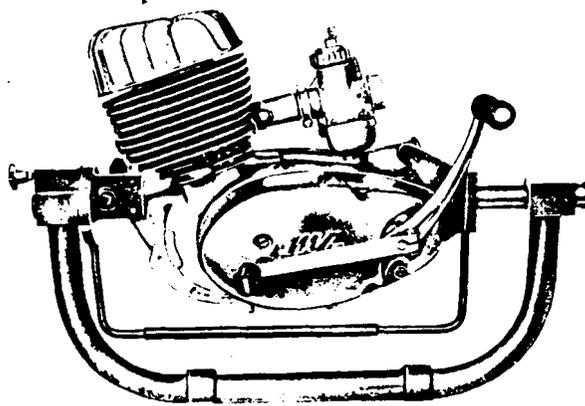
Placing the engine in the 05-MW 197-0 assembling fixture
